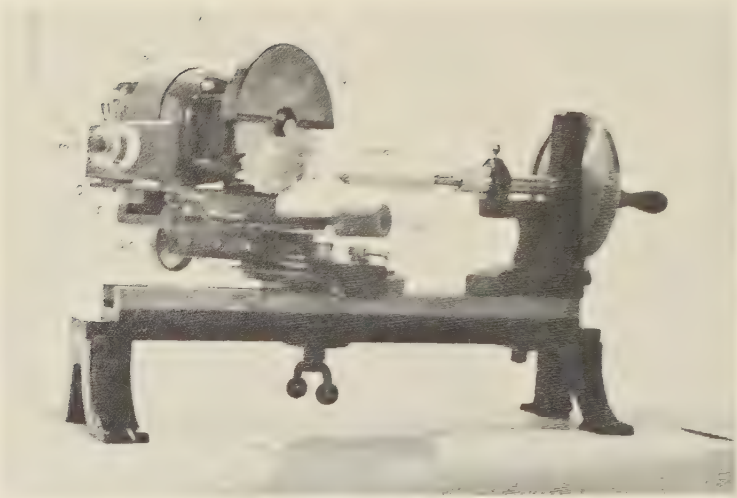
The Goldschmidt Model-making Machine Showing the Saw Attachments Adapting it to Wooden Model Cutting.
